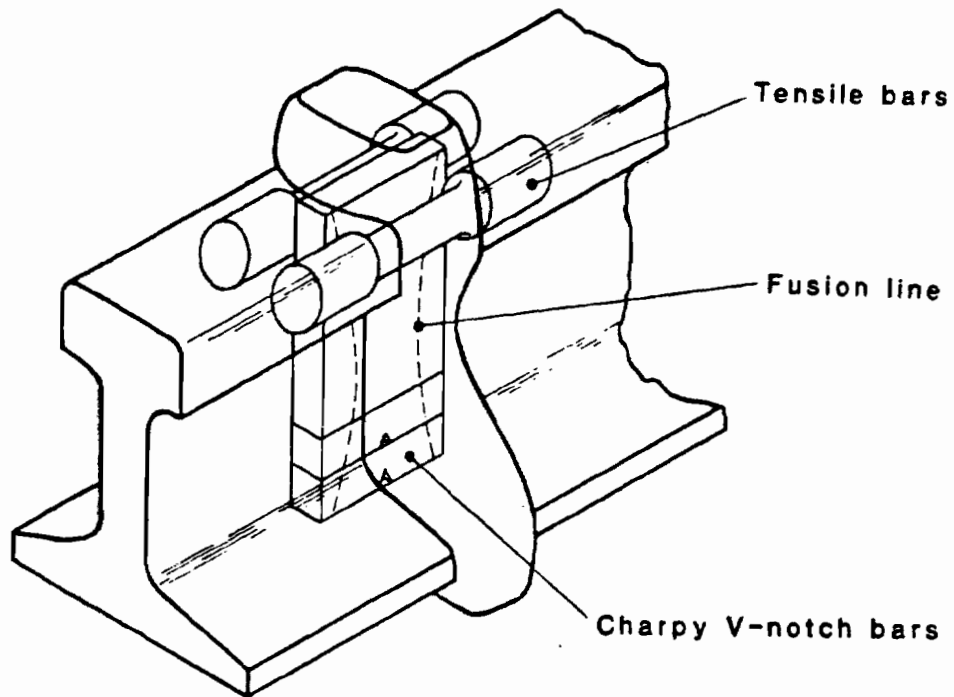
LOCATION OF ELECTROSLAG RAIL WELD MECHANICAL PROPERTY SPECIMENS.
